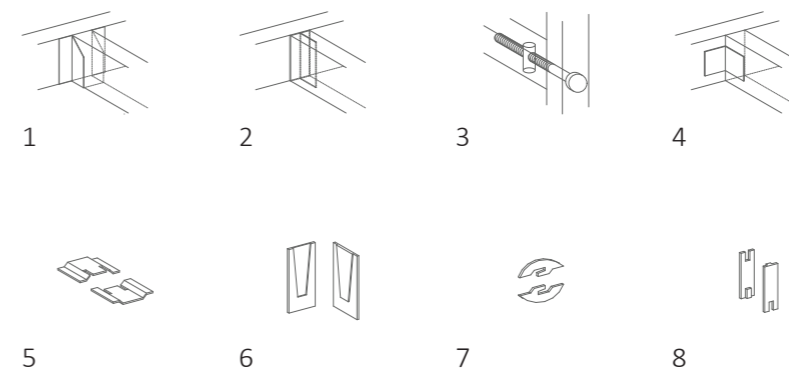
Drawing Mechanical fasteners joinery. ©Personal illustration.
